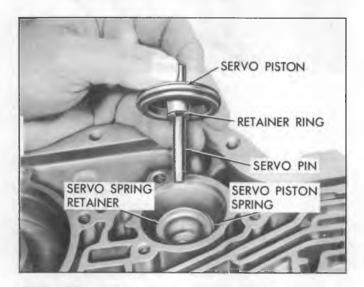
T--Removing Front Servo Piston, Retainer Ring, and Pin
